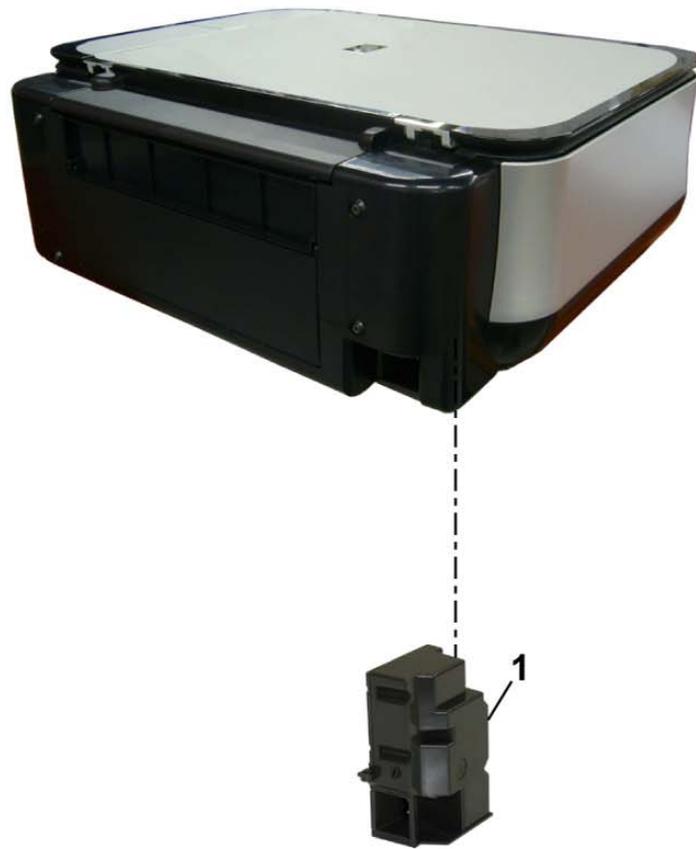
PACKING CONTENTS & PRINT HEAD
